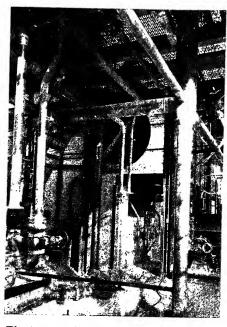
Typical installation of oxy-acetylene welded piping.
